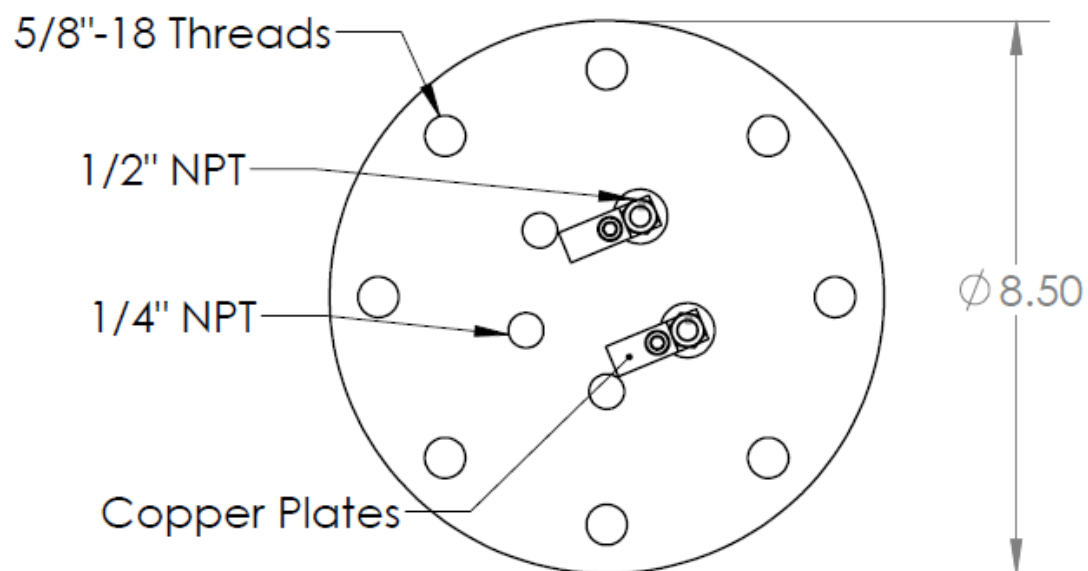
CAD drawing of the wire-mesh pressure vessel base.
